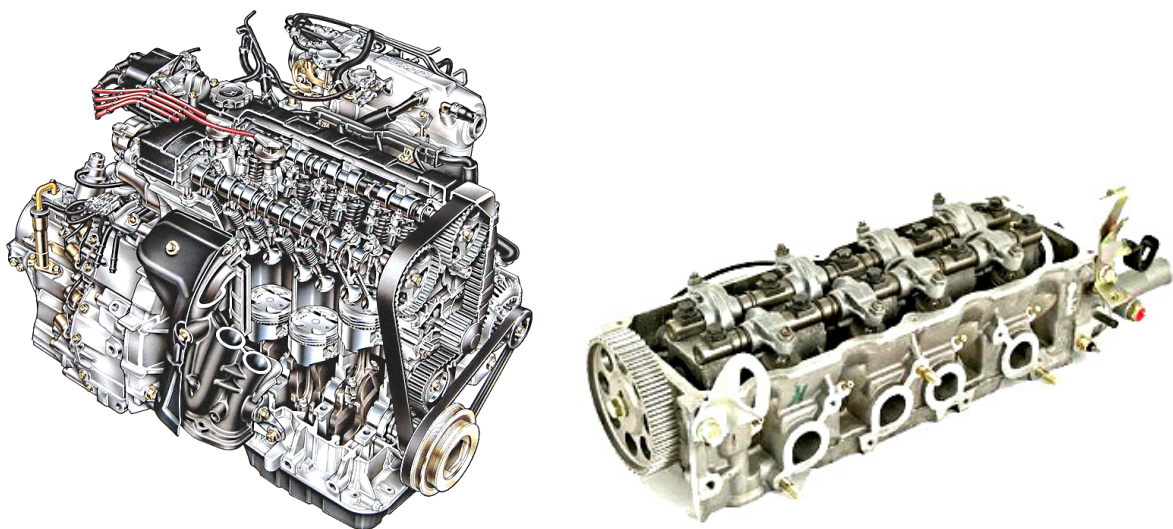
Example of engine and appropriate cylinder head [20]
